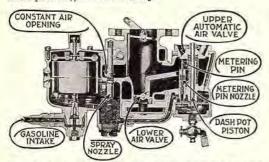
Sectional side view of Rayfield model "G" carburetor.
